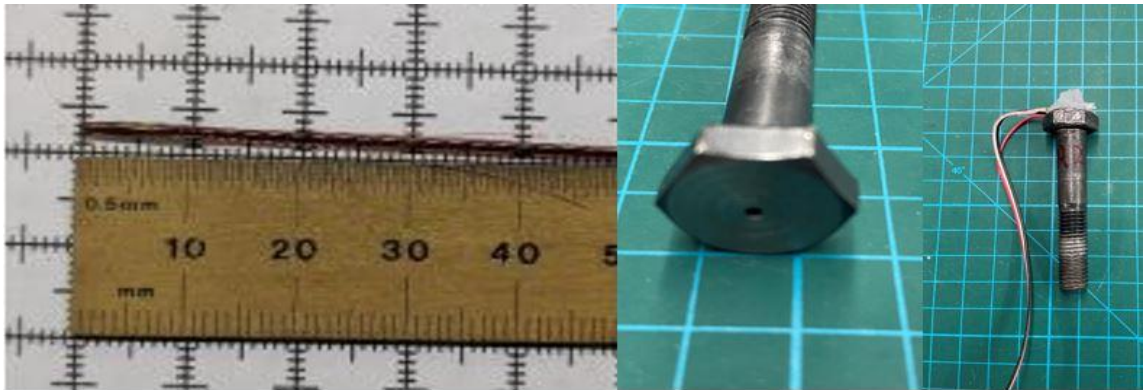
Strain gauge, Bolt Hole, and finished strain gauge bolt
